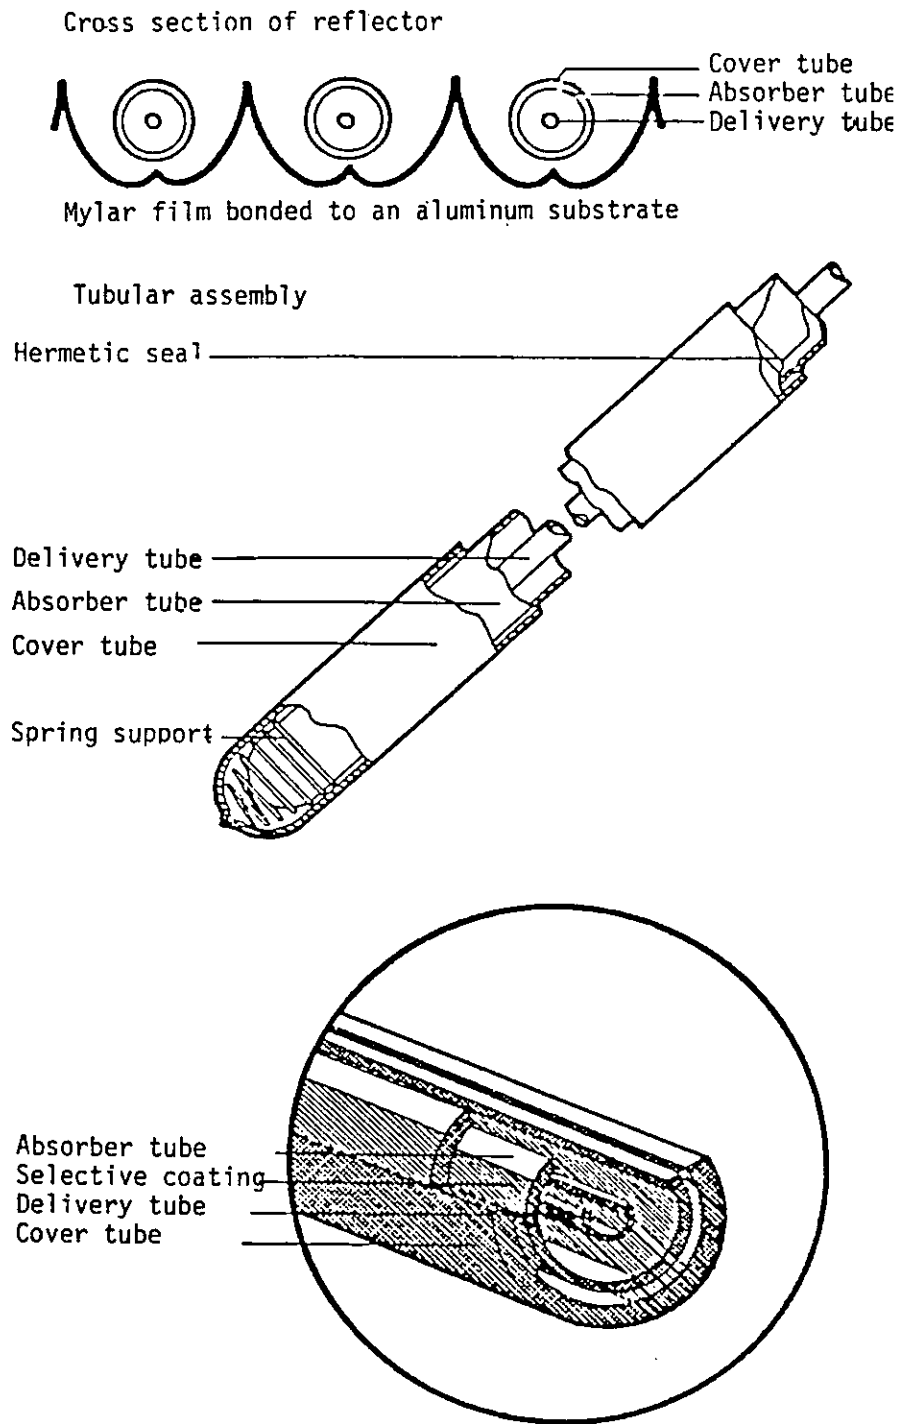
Cross Section of the Solartech Collector, Mountain Spring Bottle Washing Facility, Canada.
